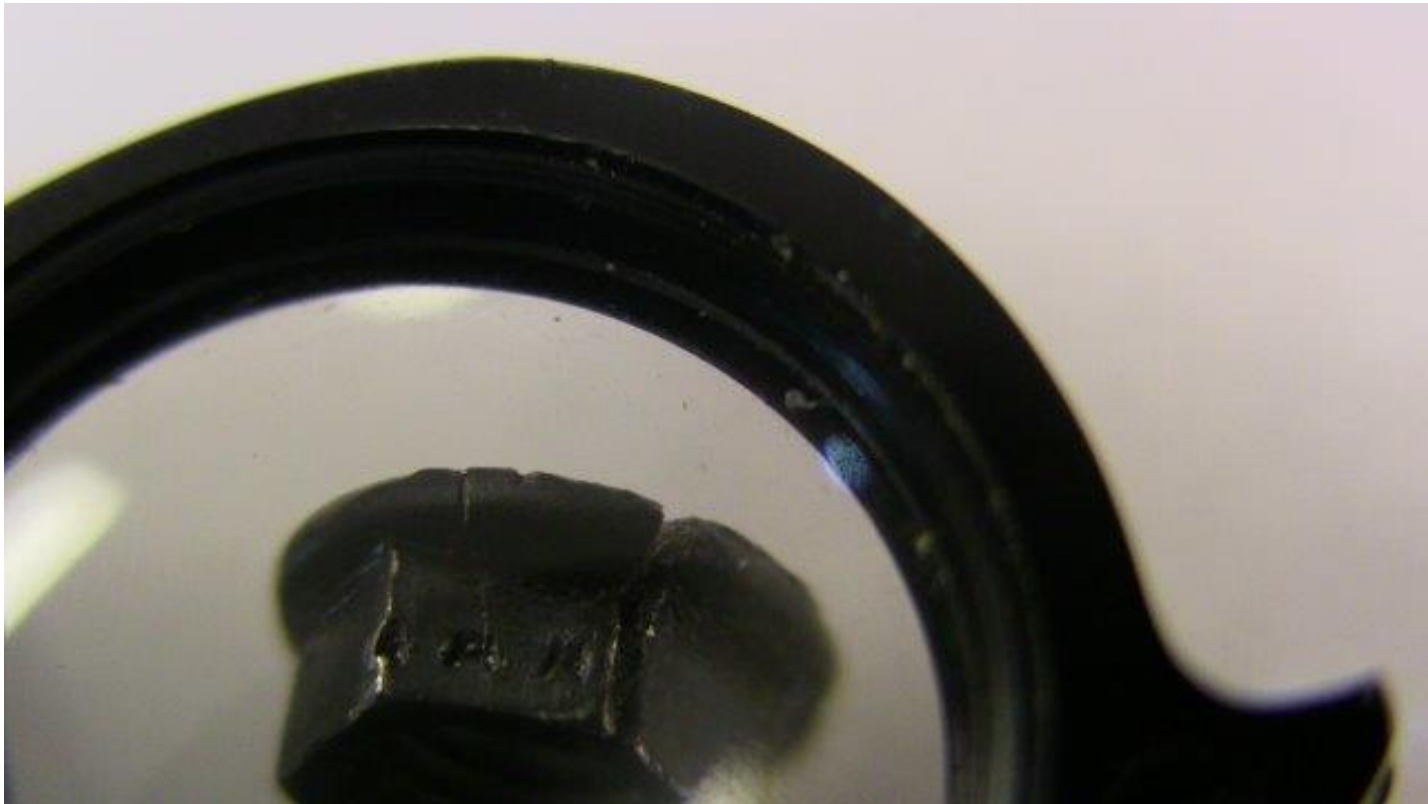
Cracked nut with markings “A A A” viewed through magnifying glass. The first “A” appears to be a partial stamp.
